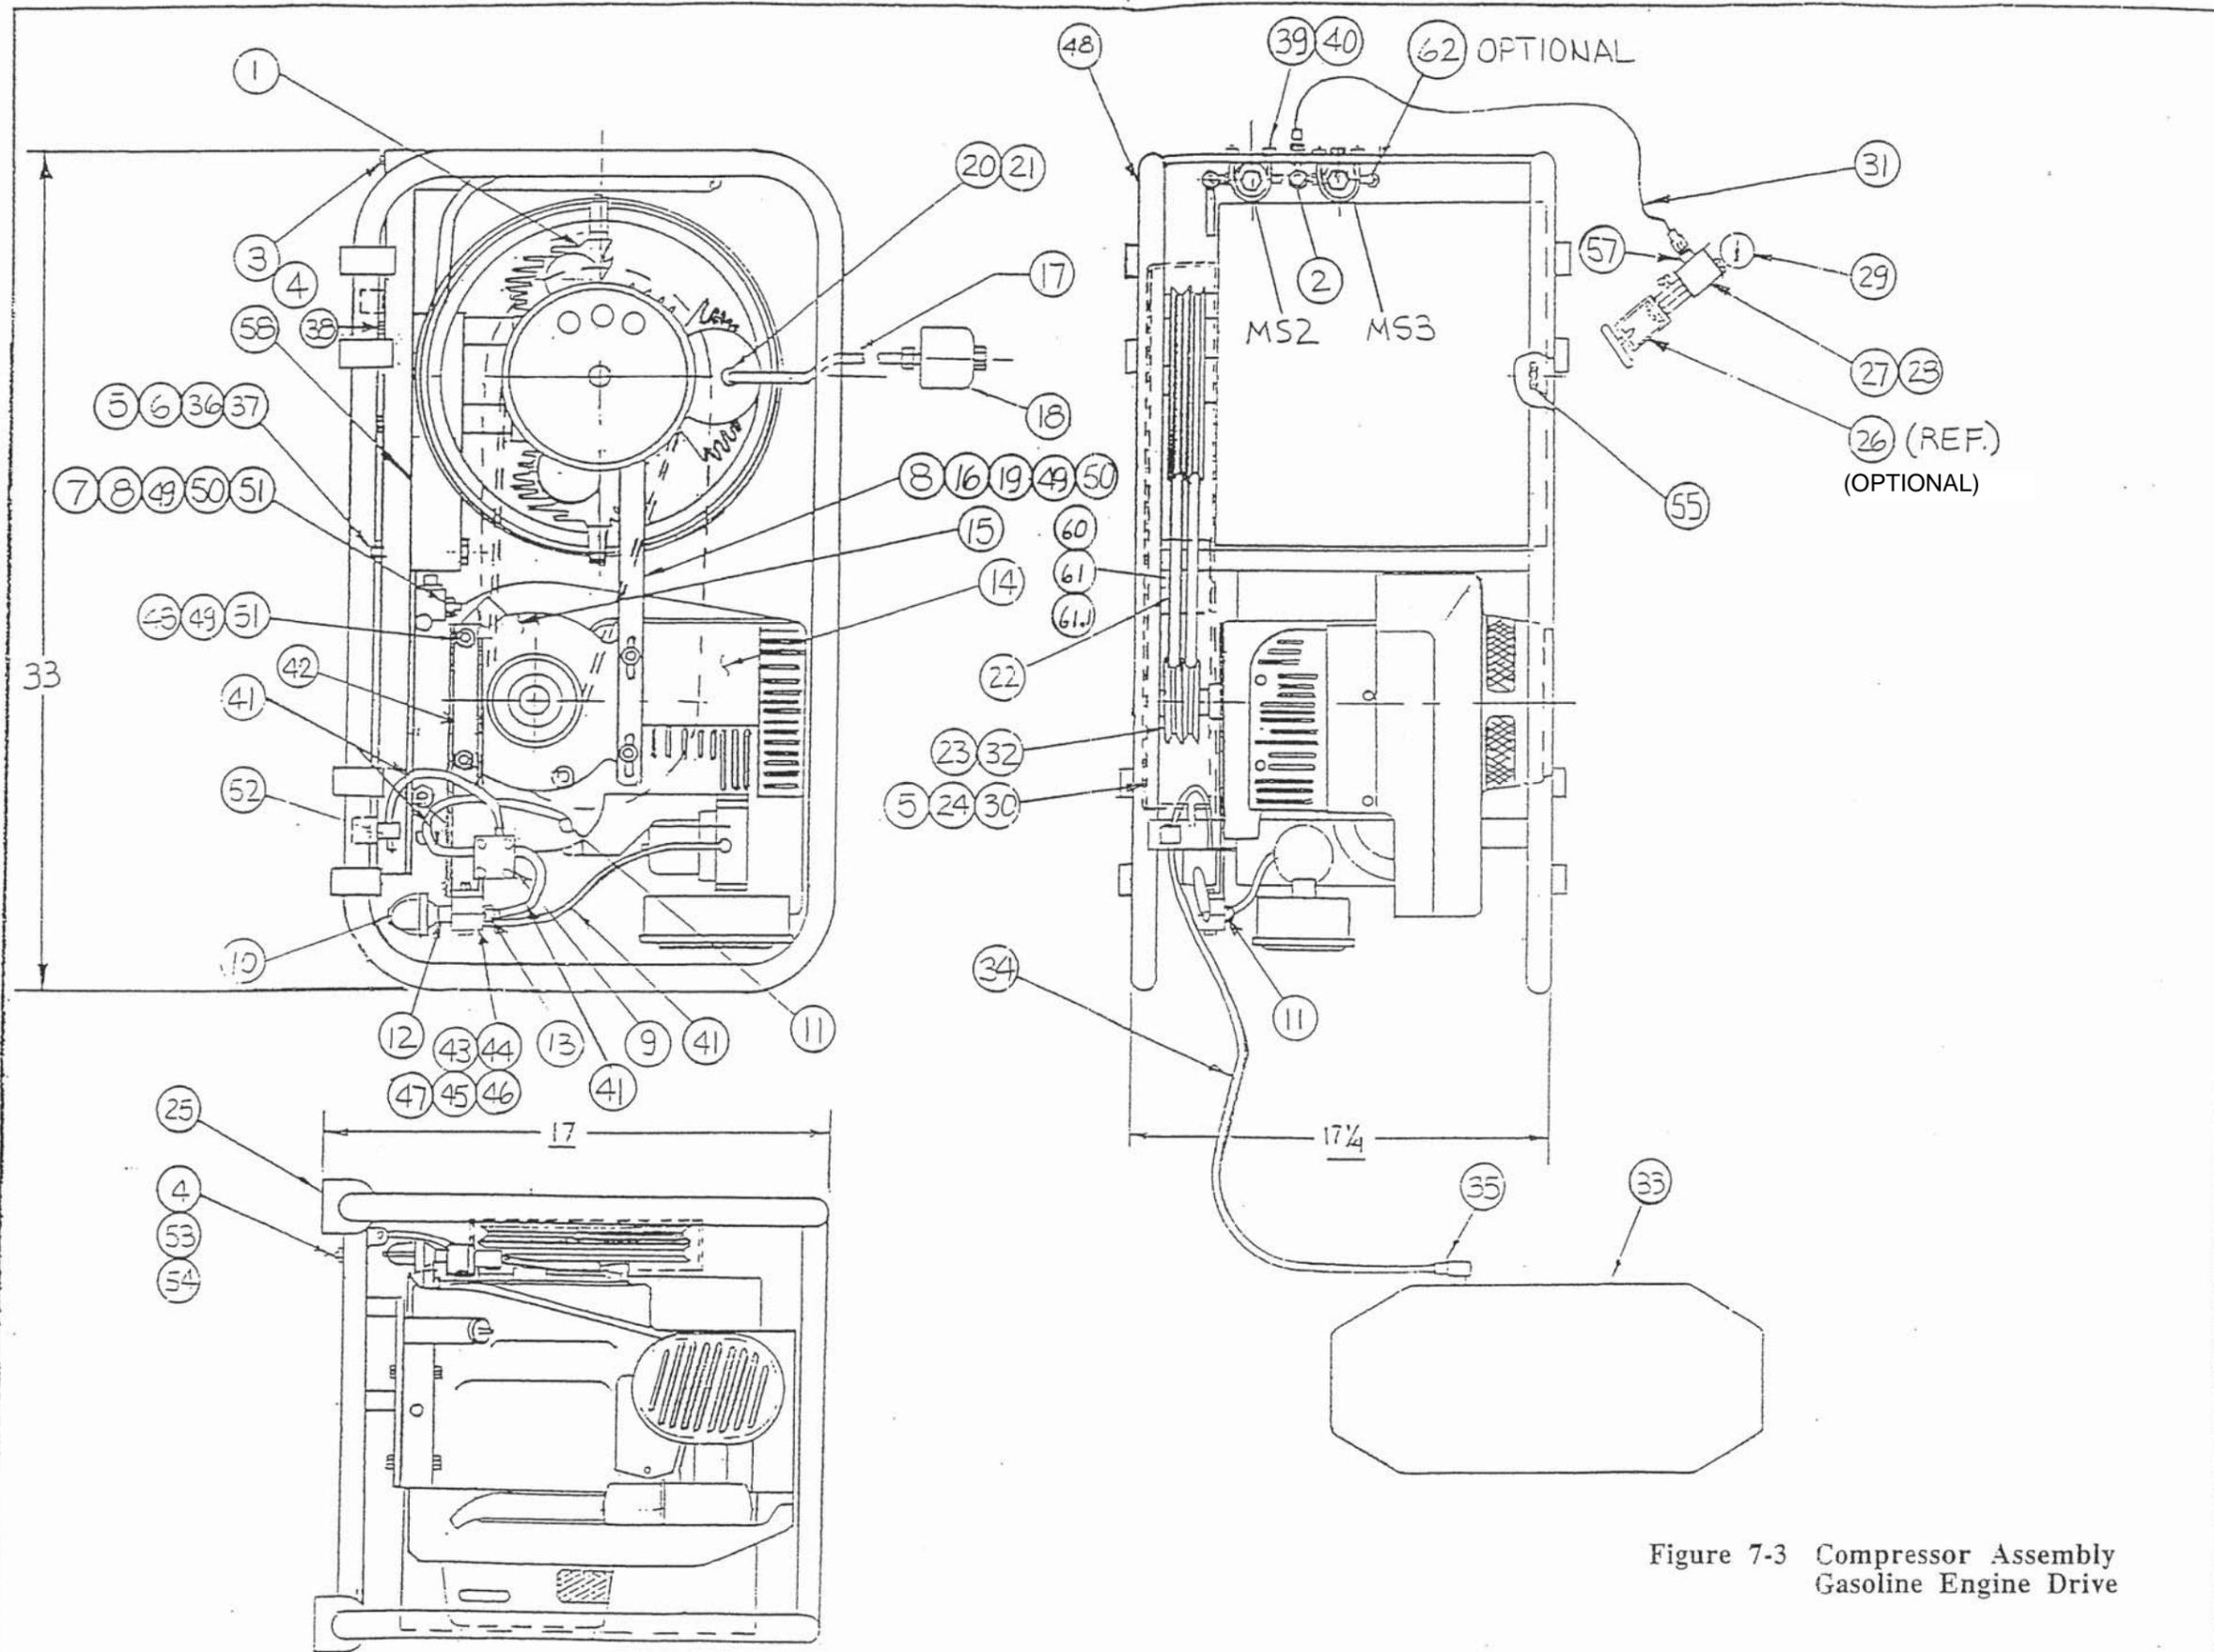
Compressor Assembly Gasoline Engine Drive
